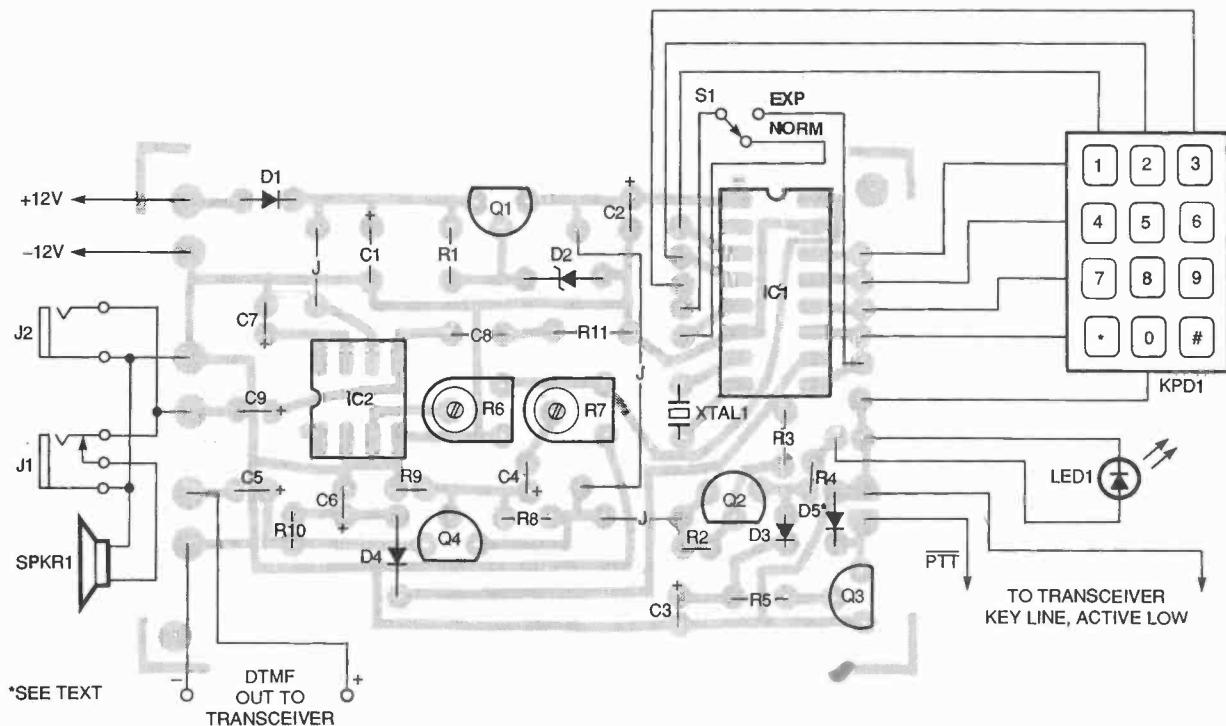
If you're using a PC board to build the Tone Pad, this parts-placement diagram should make assembly easy.
